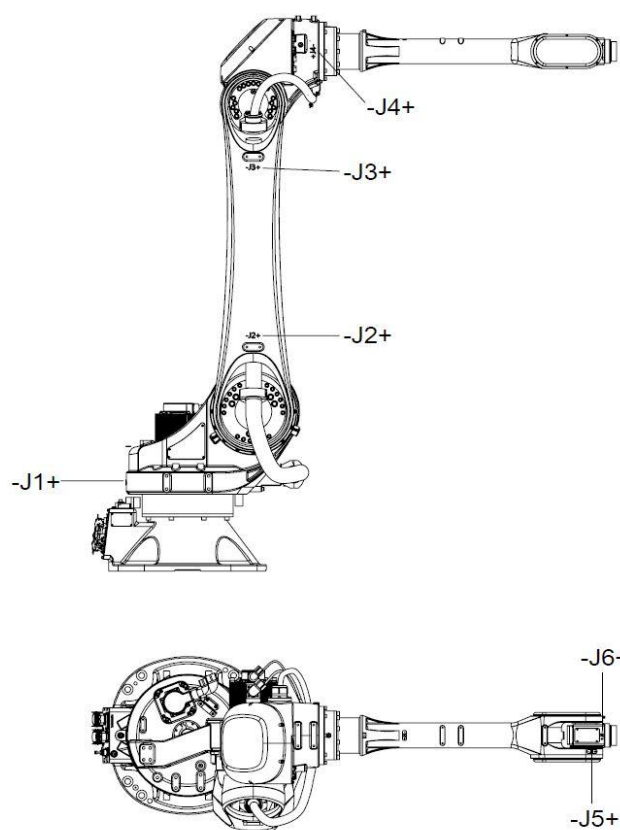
Axis Direction Indicators on the RX3-A635-2700 Operator
